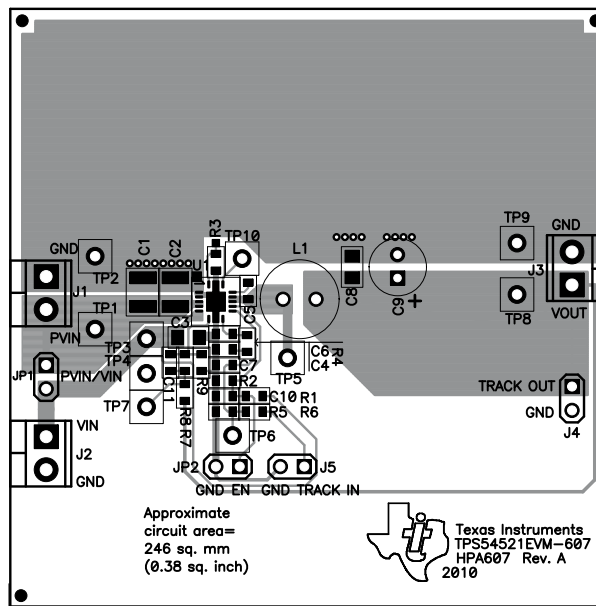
TPS54521EVM-607 Top-Side Assembly
